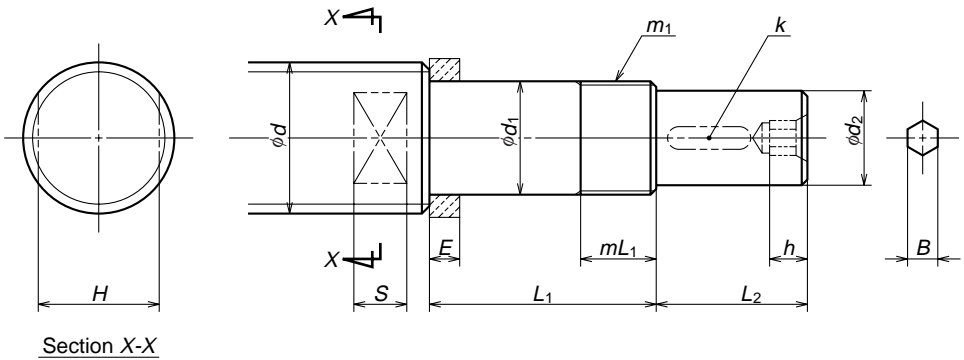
Rolled ball screw shaft end (drive side)
